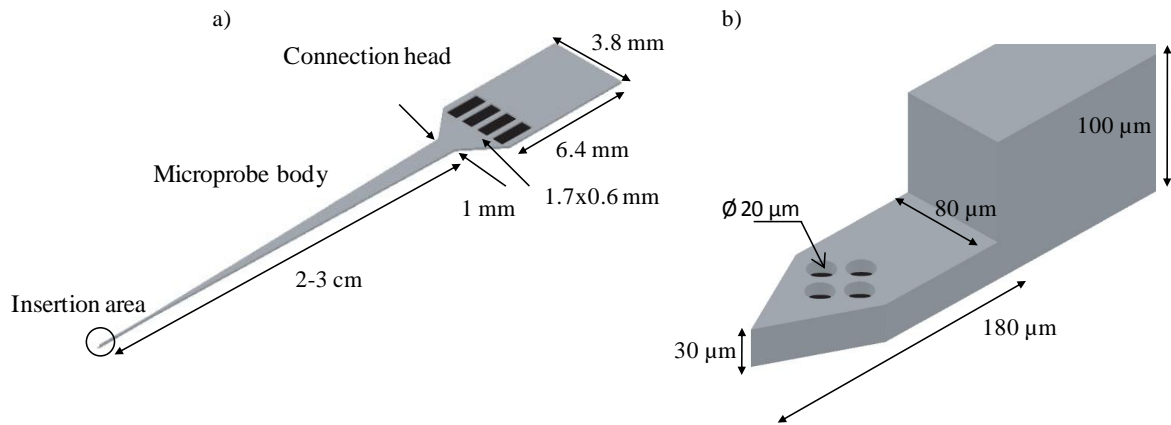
a) Schematic drawing of the microprobe and b) schematic drawing of the tip
